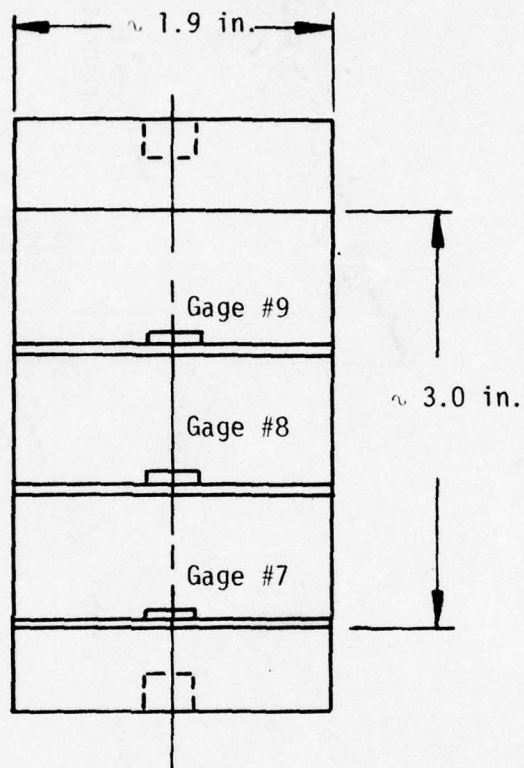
SCHEMATIC OF UNIAXIAL TEST FIXTURE
